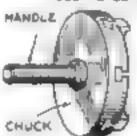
A plug for protecting the acrew thread in the spindle hole of a small lathe chuck. It also makes a convenient handle.
